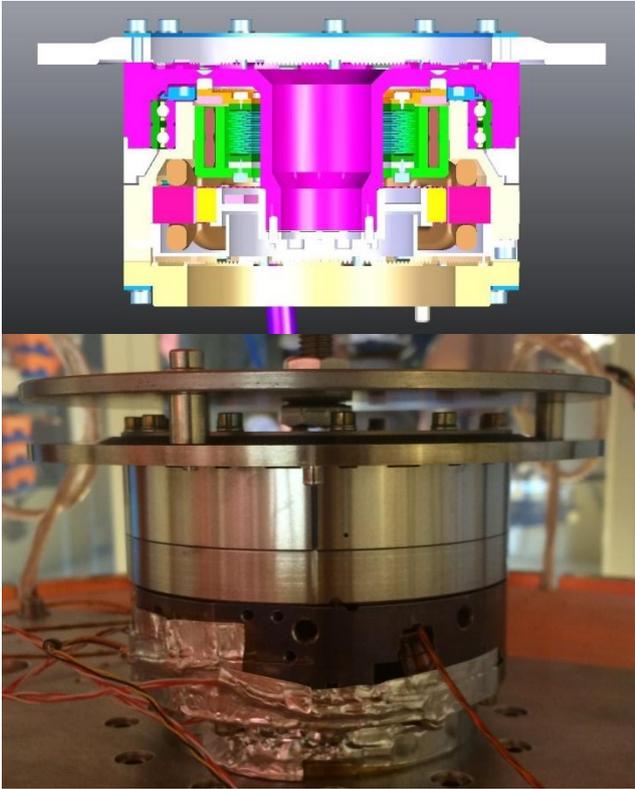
CAD cut view and picture of the Euclid cryomechanism
